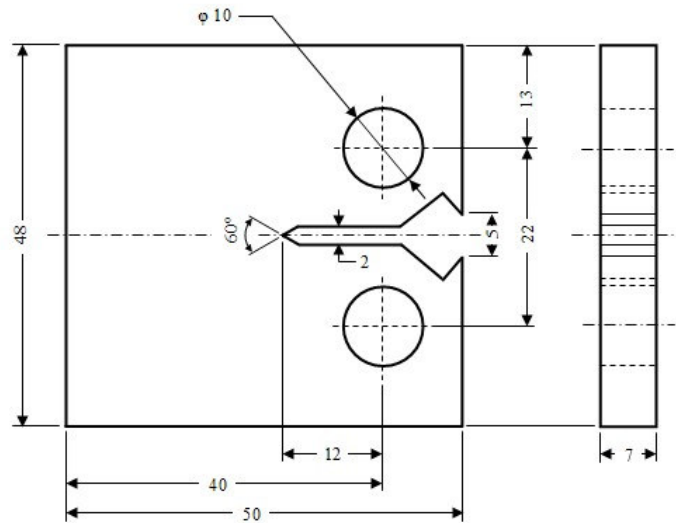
Dimensions (millimeters) and fatigue crack geometry of specimens (ASTM, 2000).
